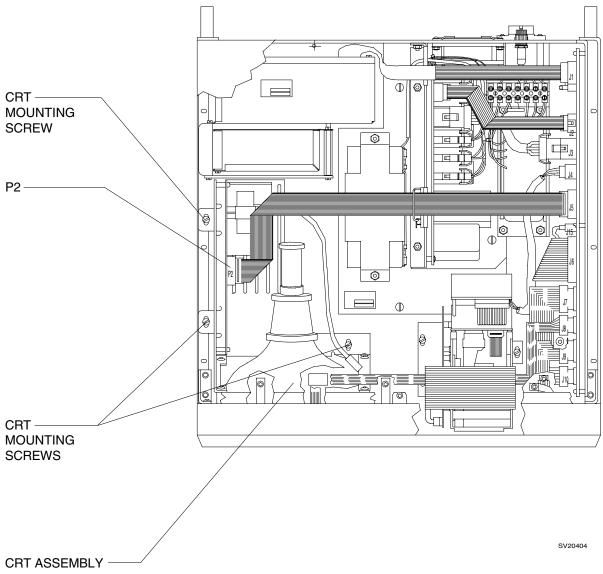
REPLACEMENT OF CRT ASSEMBLY
